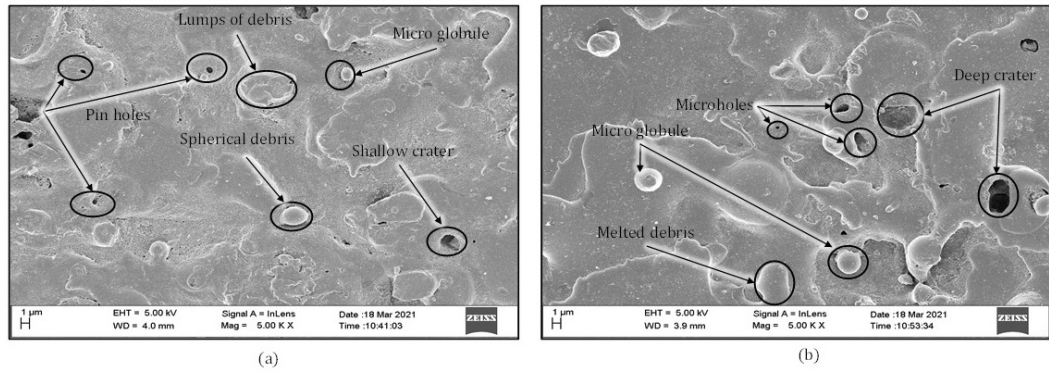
Surface topography/morphology analysis of machined workpiece parts through FESEM
